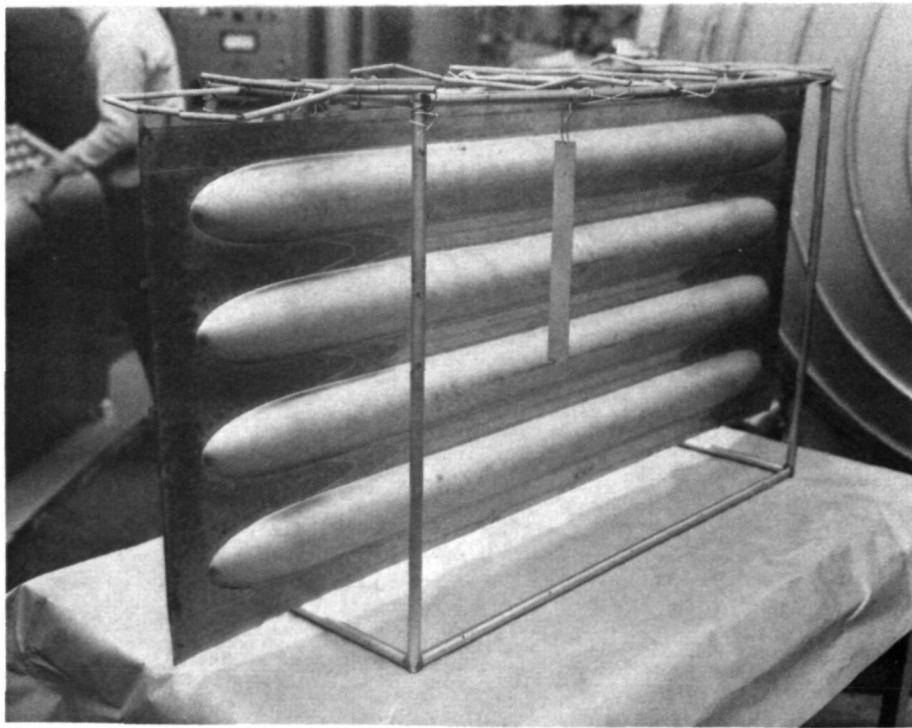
PANEL FINAL ASSEMBLY MOUNTED IN AGING RACK
